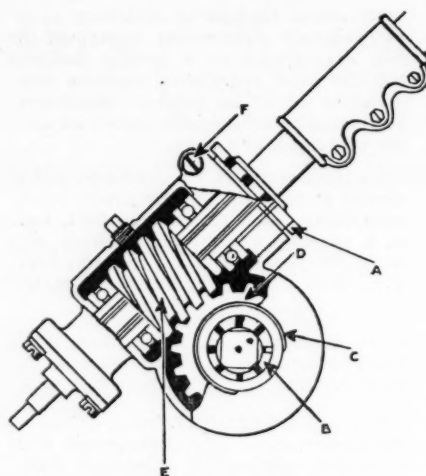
Sectional view of Mitchell steering gear, showing adjustments
